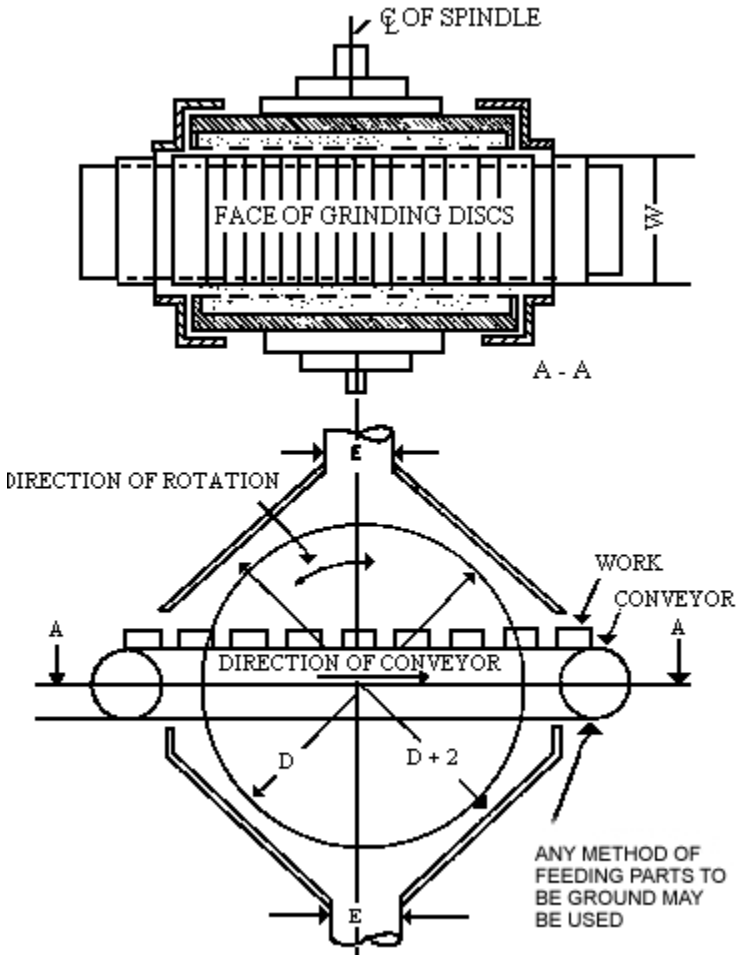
Horizontal Double-Spindle Disc Grinder Exhaust Hood and Branch Pipe Connections
